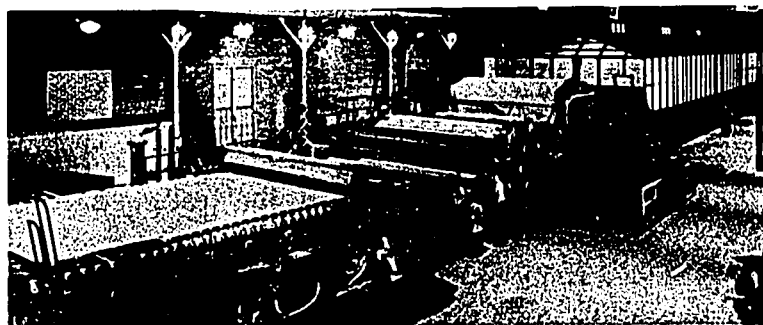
Many products are made by continuous processes. Raw materials go in one end of this machine and finished paper comes out the other.
